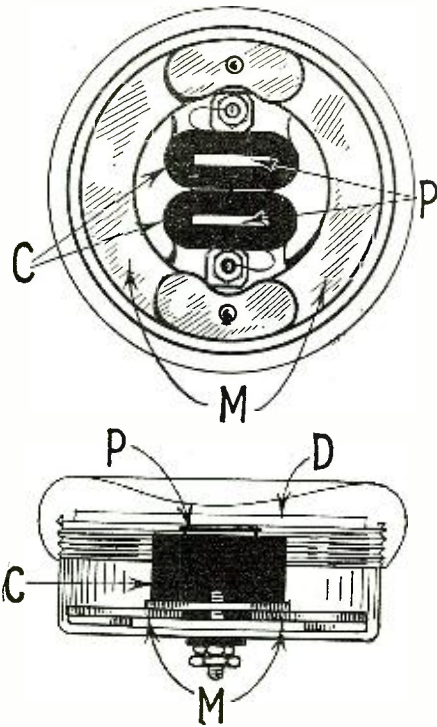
Drawing showing mechanical construction of standard phone unit: M, permanent magnets; C, coils of wire; P, pole-pieces of magnet; D, diaphragm.
